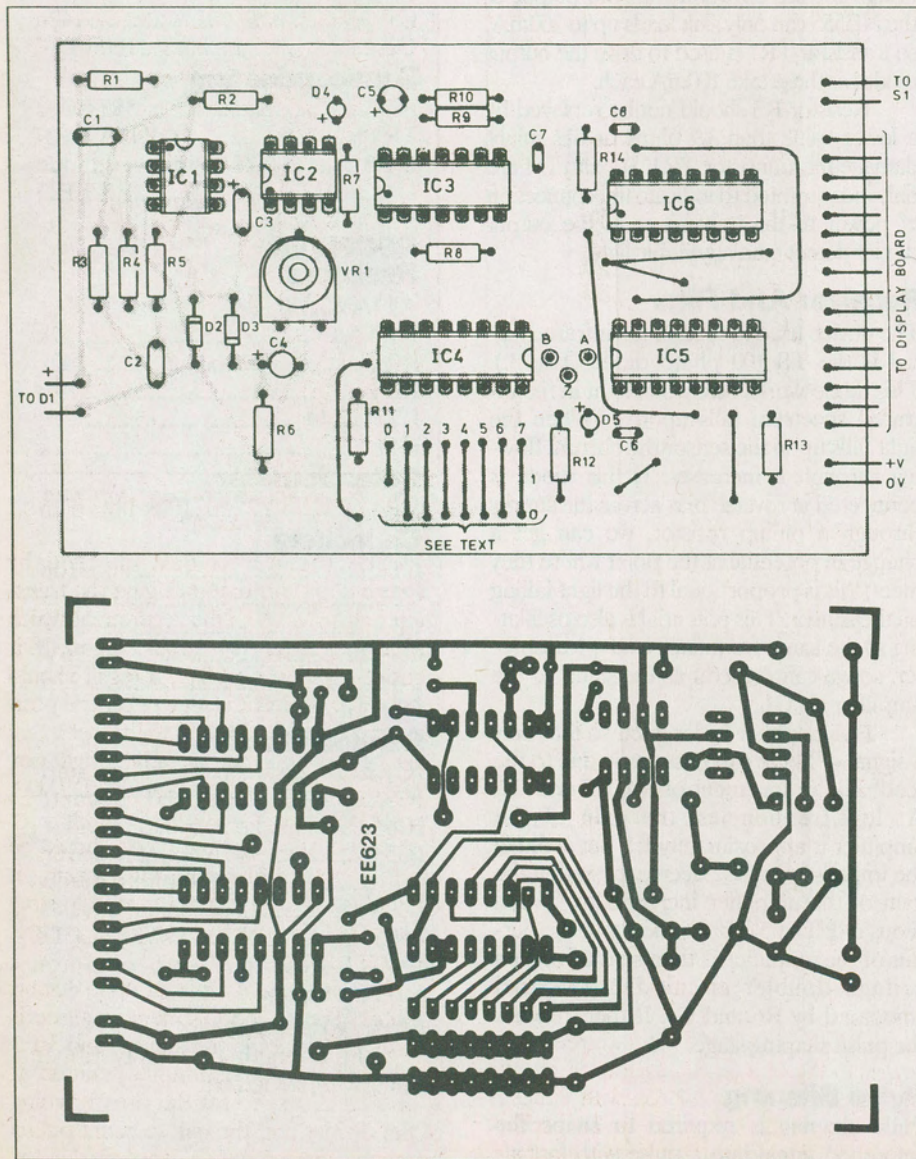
The component overlay (top) and the PCB for the Object Counter.
